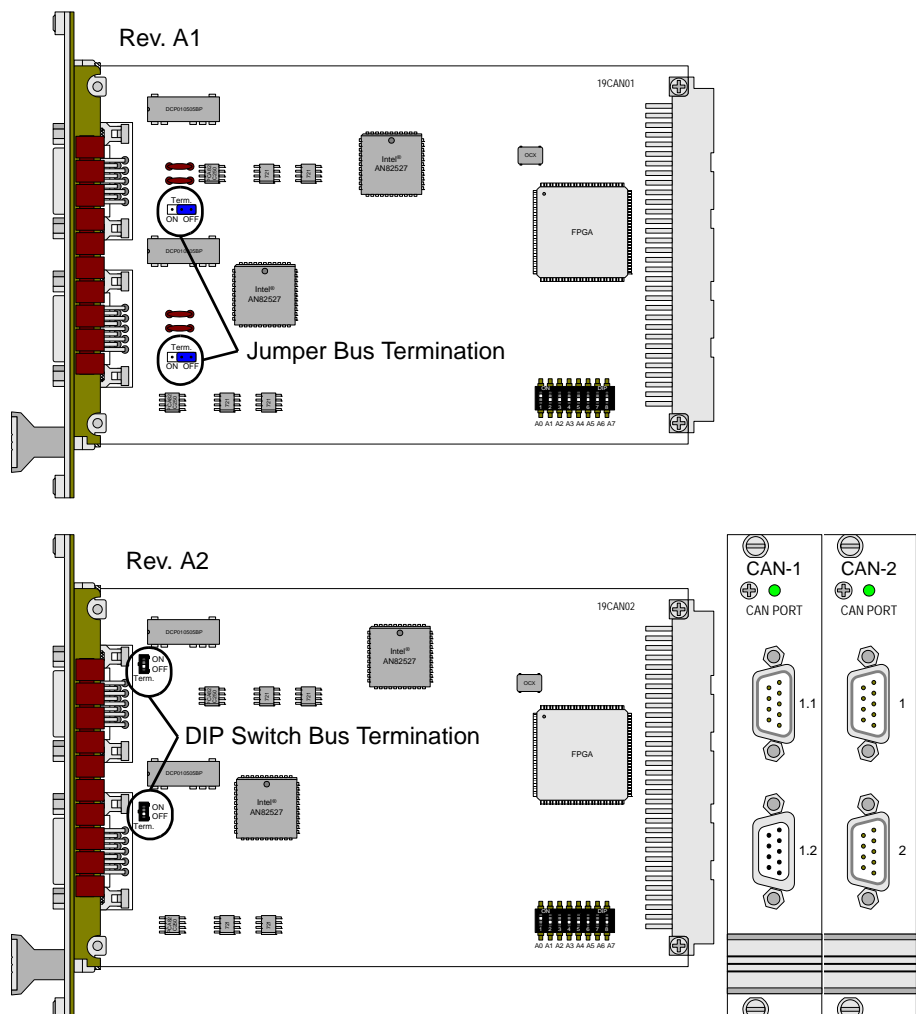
Pro-CAN-1/-2: PCB and front panels
